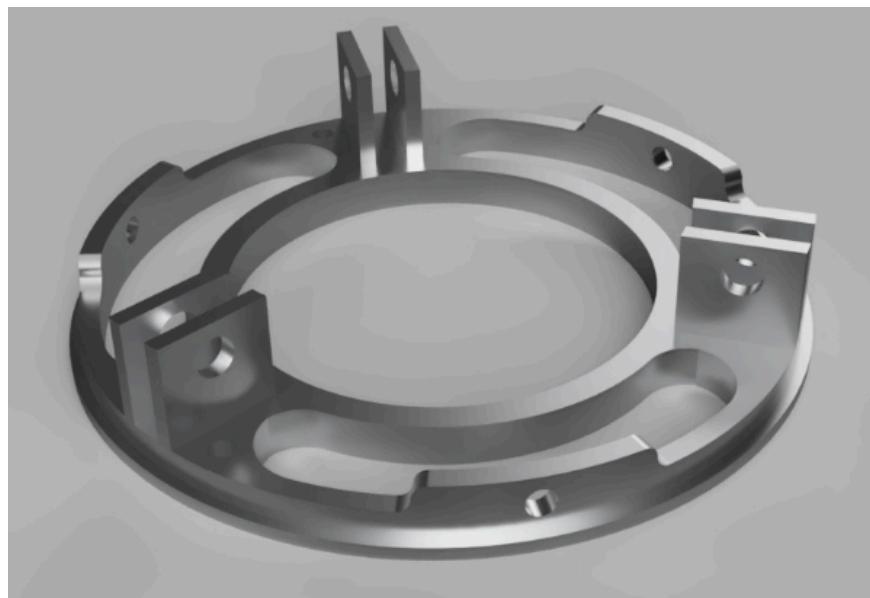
Thrust Plate CAD Model Render
